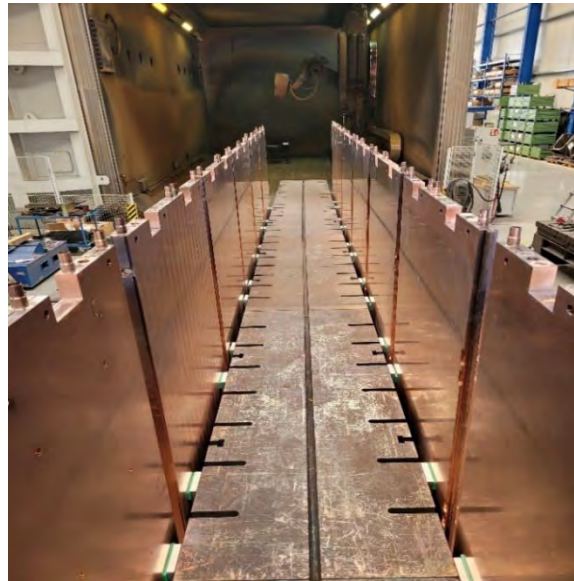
Panels of the Neutralizer ready to enter in the vacuum chamber for the electron-beam welding
